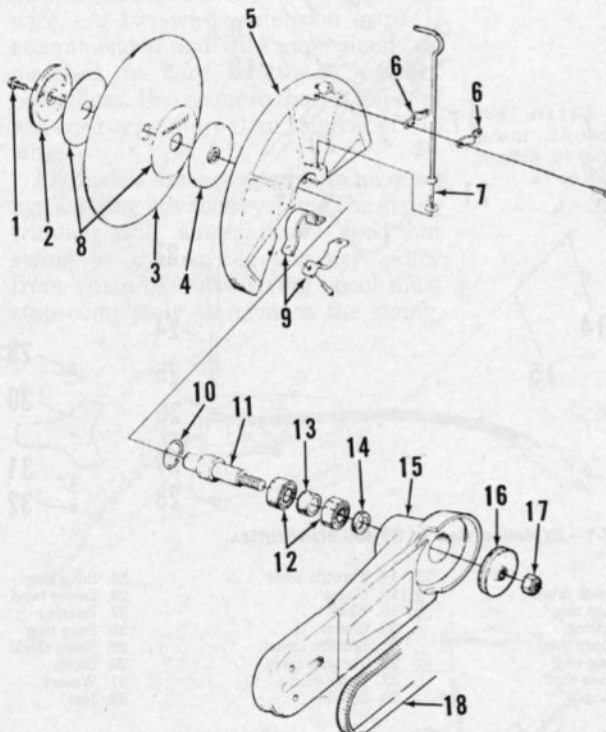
Exploded view of saw arm assembly used on Model XL98A.
